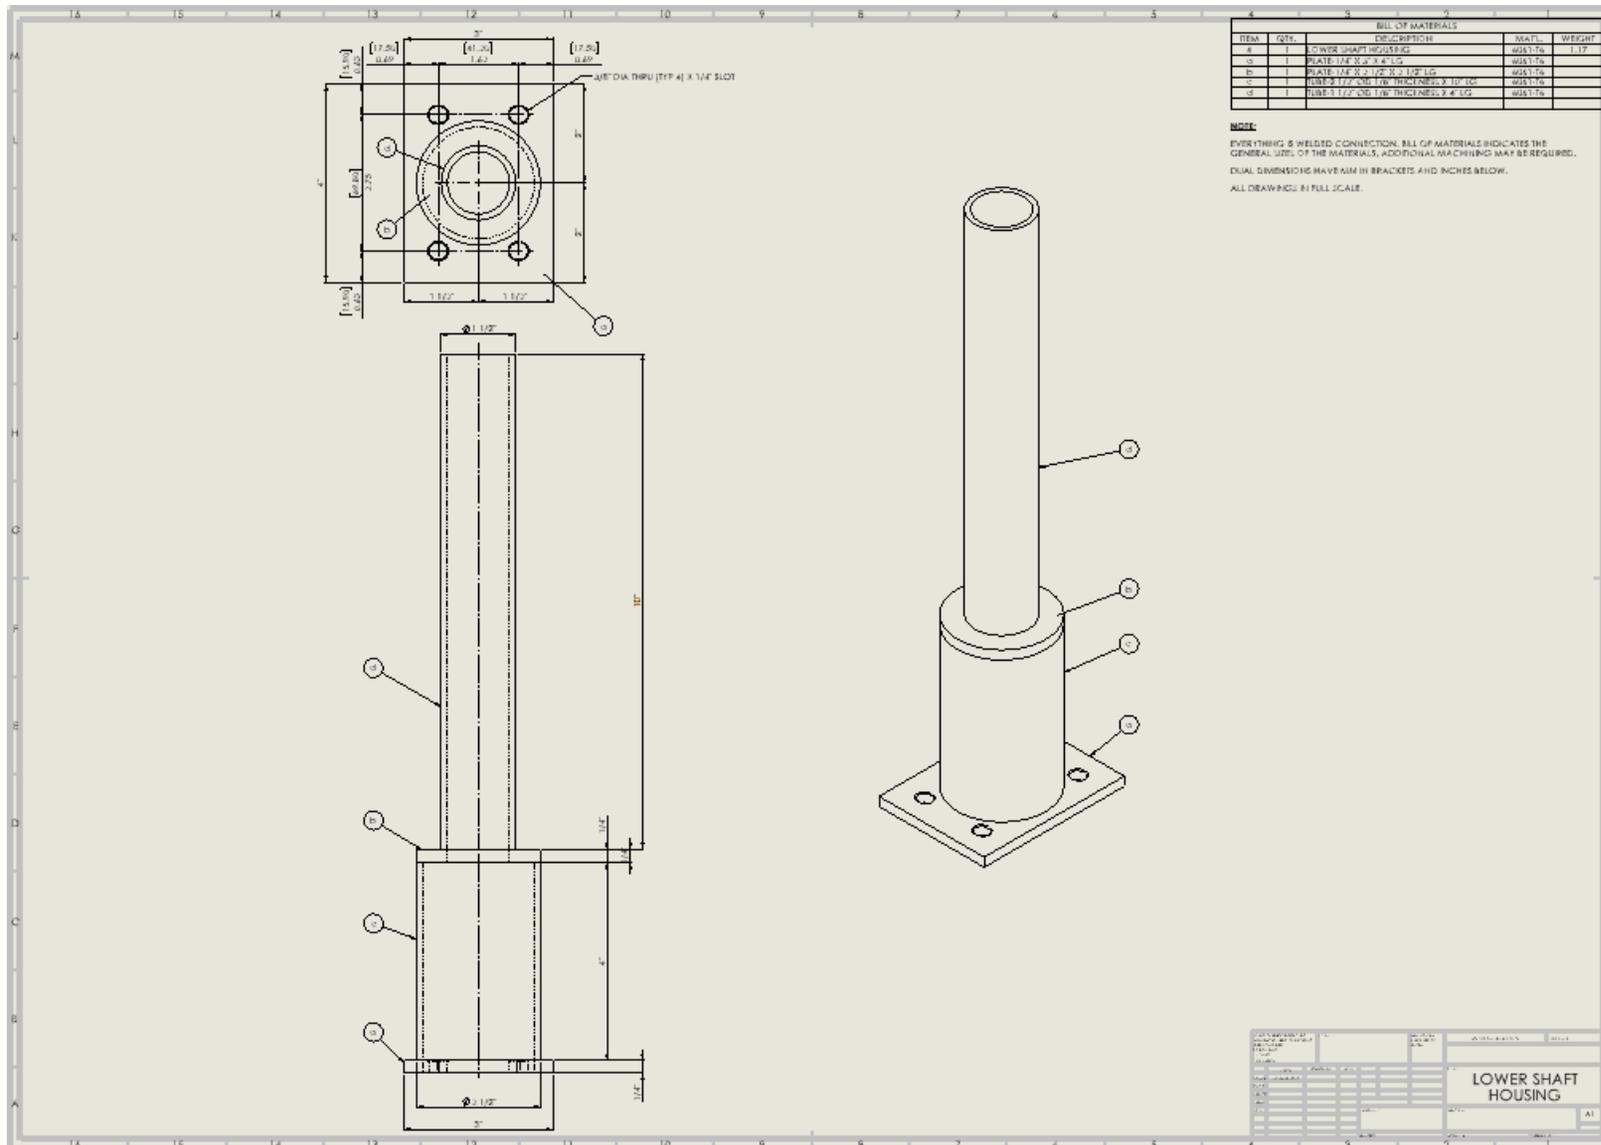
Fabrication Instruction Sheet for Lower Shaft Housing
